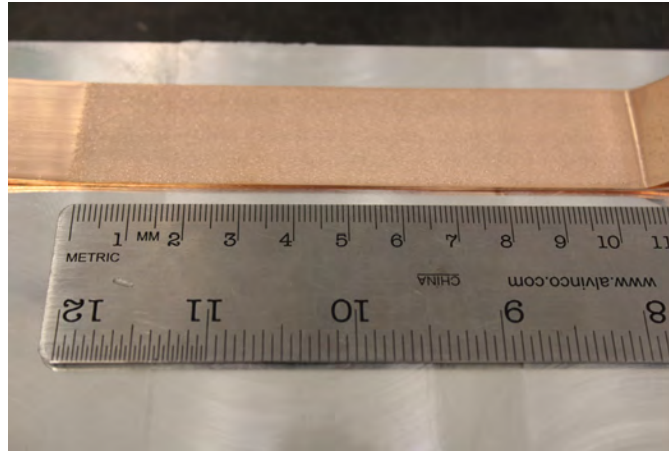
Ten-layer stack of Cu C11000-O60 foil welded onto a 9.53 mm (0.375 in) thick Al 6061-T6 baseplate.
